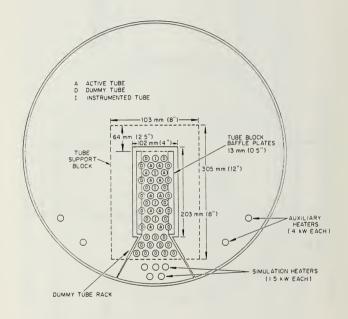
Sectional View of Evaporator Showing Tube Bundle, Dummy Tube Rack and Simulation Heaters
